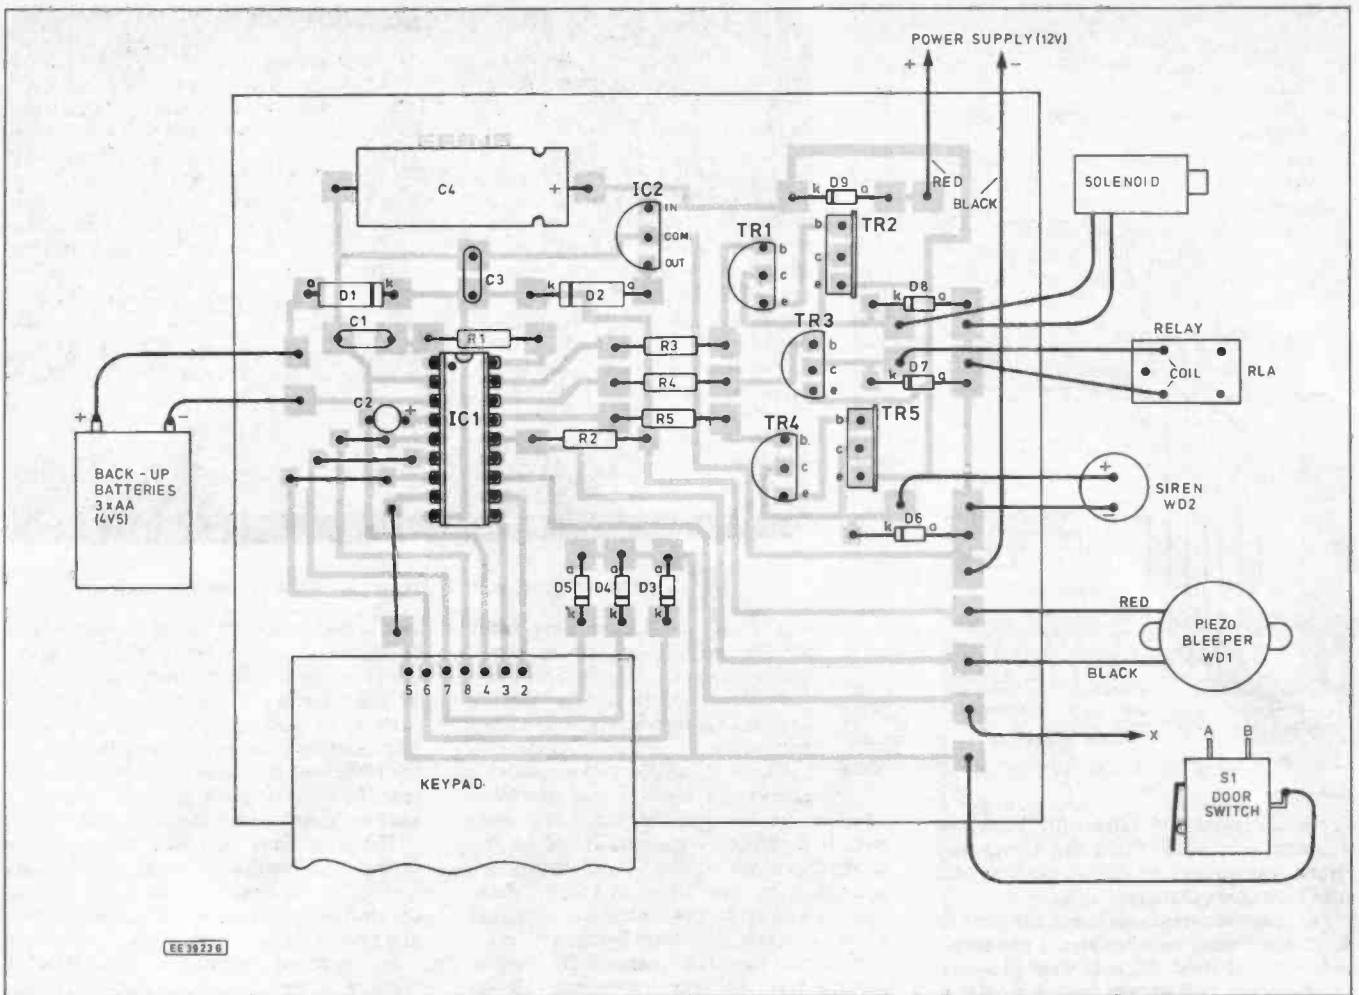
Printed circuit board component layout and wiring to off-board components. Wiring from the keypad is shown in Fig. 4.
